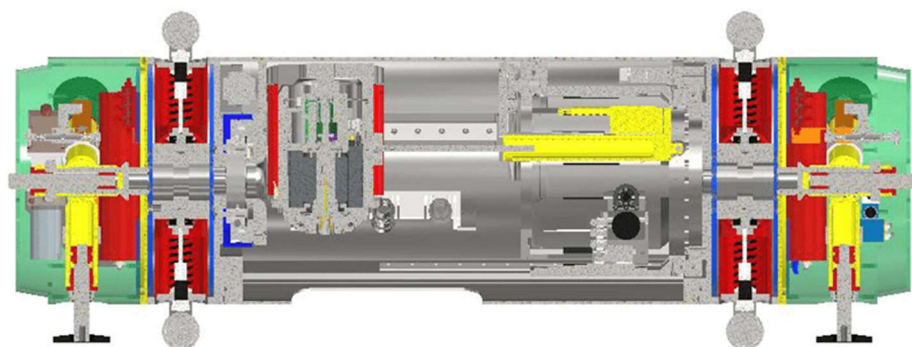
Schematic of FSWBOT – an underoil Friction Stir Welding robotic crawler (Forth Engineering (n.d.)).
